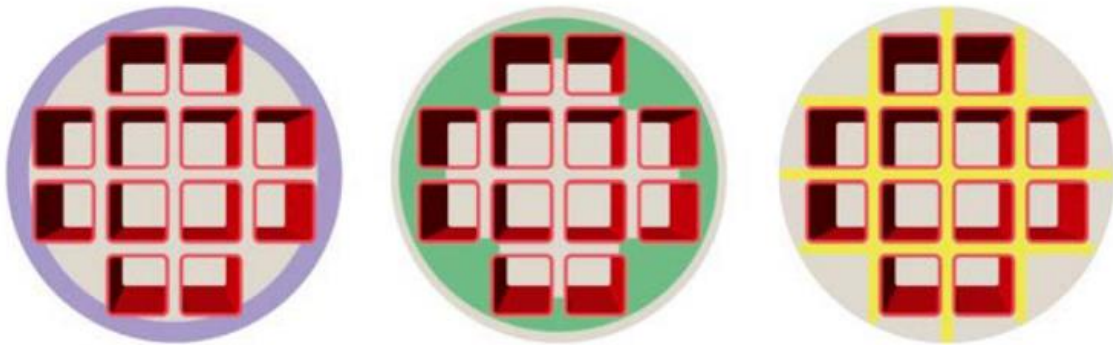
Different inspection techniques for BWR insert depending on the volume that is being inspected. Angle inspection (violet), normal inspection (green) and transmission inspection (yellow).
